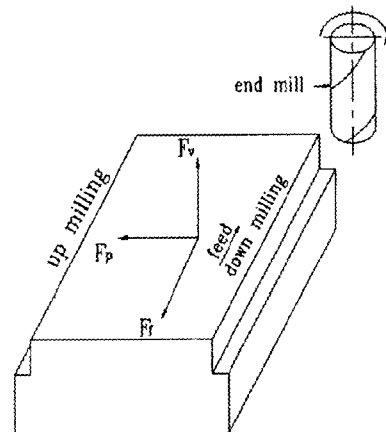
Cutting force components in end milling (F_p =principal cutting force, F_r =feed force, F_v =vertical force)
